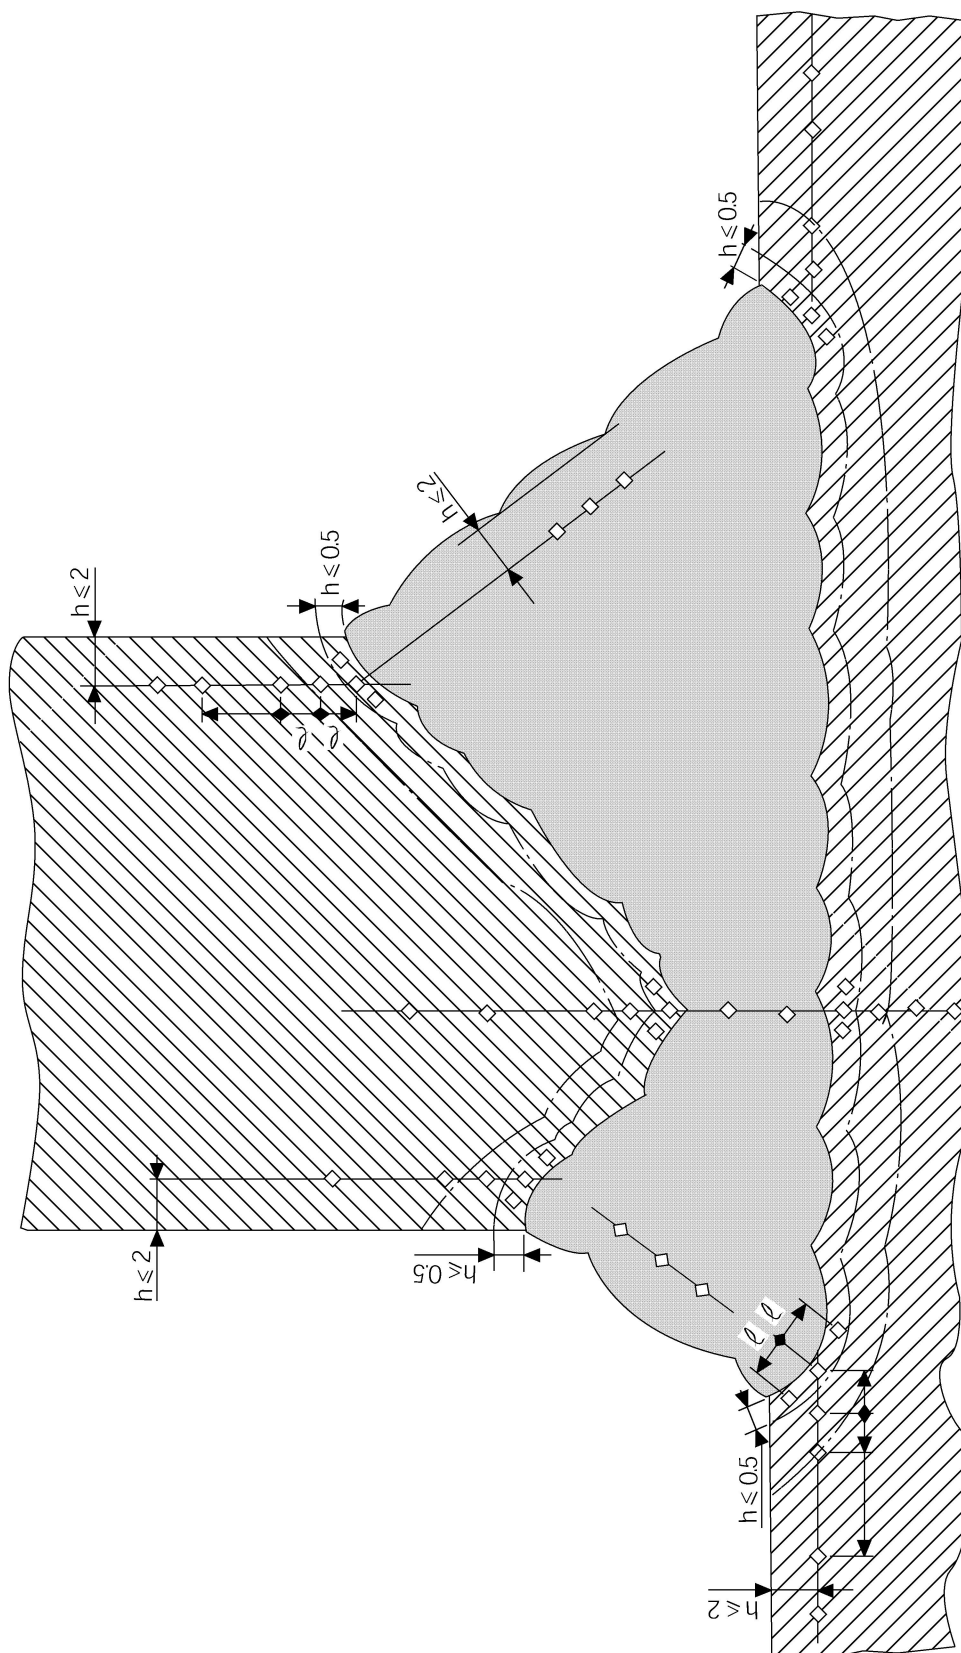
Example showing the position of the indentations for hardness test on the weld metal, the heat affect zone and the base metal of a T-joint weld (dimensions in mm)
